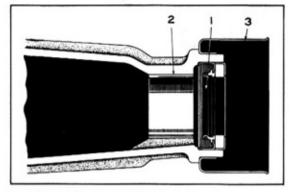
Oil Seal and Bushing Inspection
